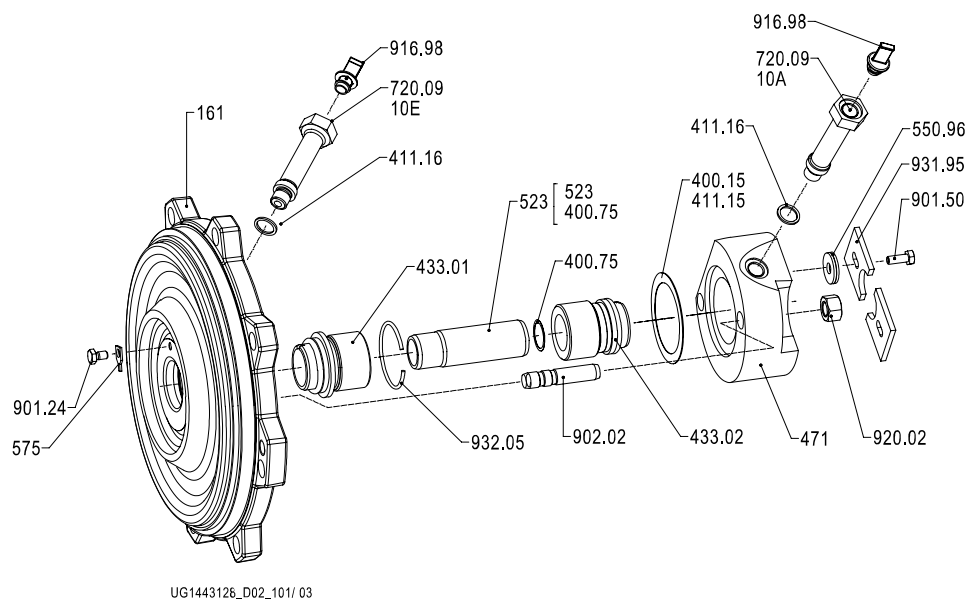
Version with double mechanical seal in back-to-back arrangement
